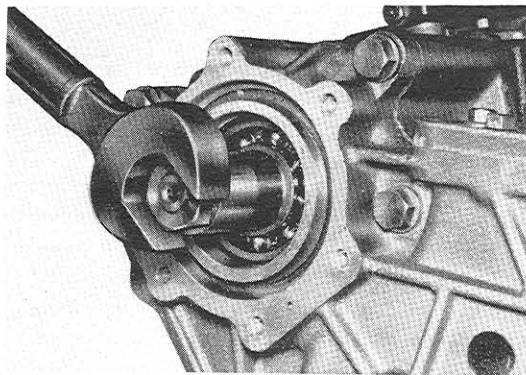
Removing Rear V0435 Bearing Retaining Nut
